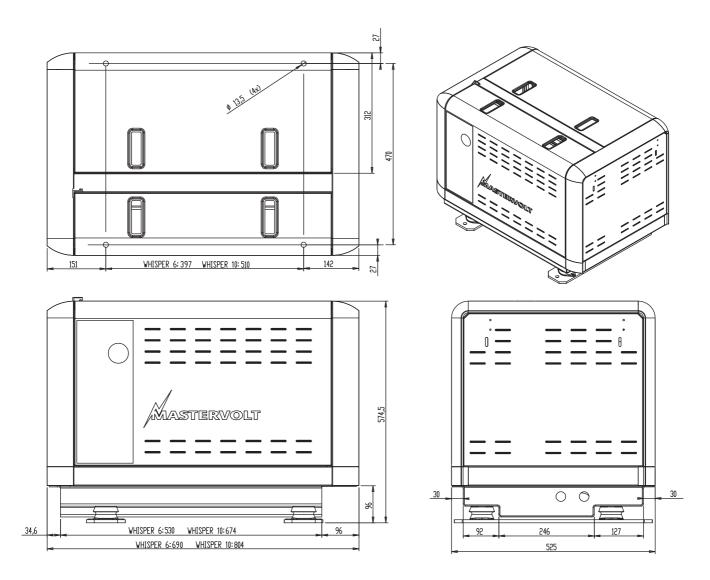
Outer dimensions (mm) Whisper 6 and 10
